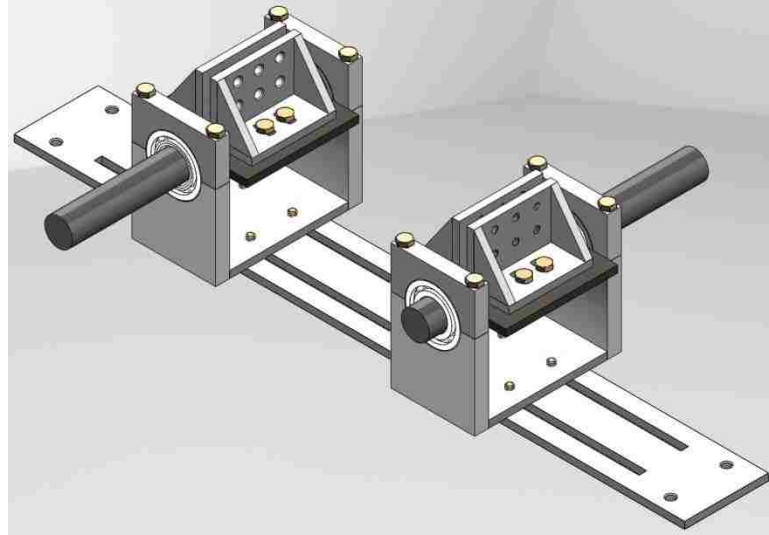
A CAD Image Showing the Slider Pair at the Clamping Zone in the Bottom-Half of the Test Setup
